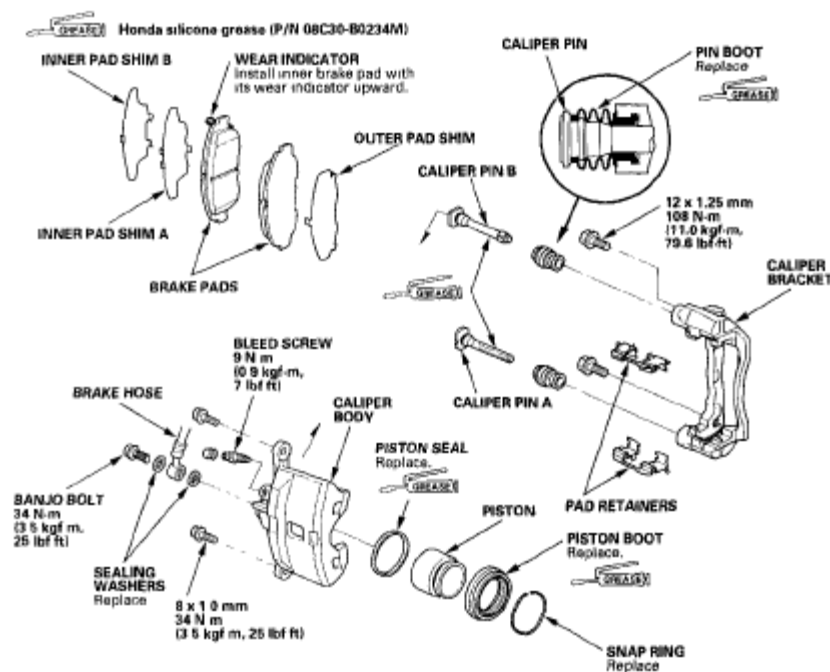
Exploded View Of Front Brake Caliper Overhaul (Except Si Model) (With Specifications)
